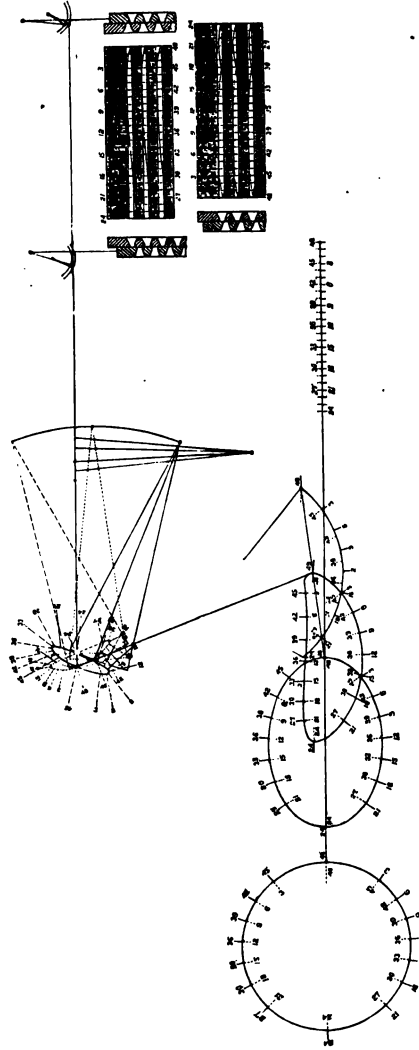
STRONG'S PATENT VALVE GEAR AND VALVES. General Disposition.
